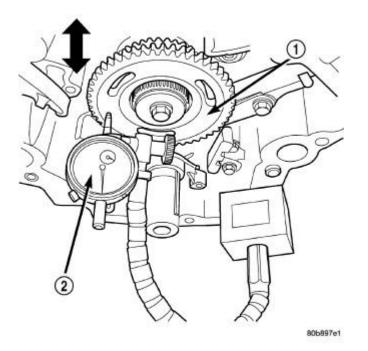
MEASURING IDLER GEAR END PLAY Courtesy of CHRYSLER LLC
